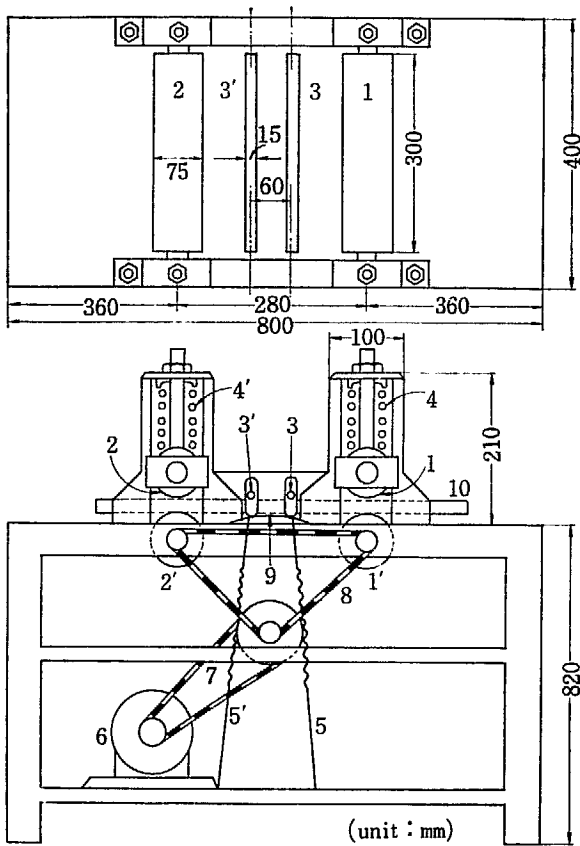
Schematic drawings for the continuous manufacture of large WPC piled board.
